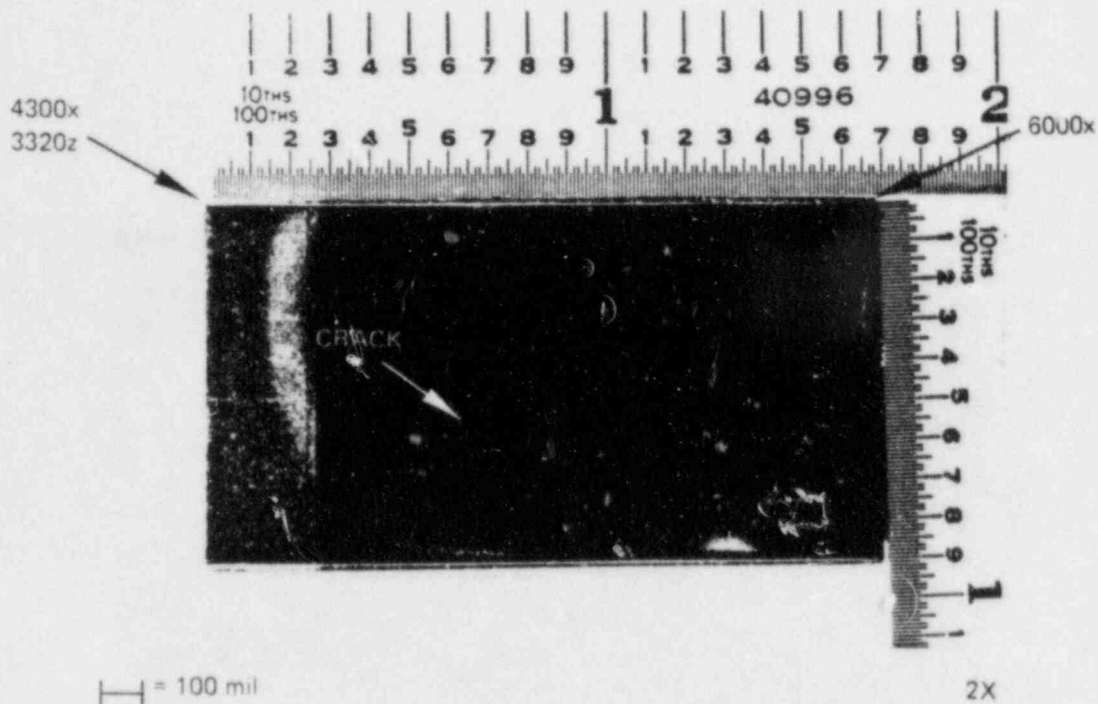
BUTT-WELDED CARBON STEEL PLATE -
